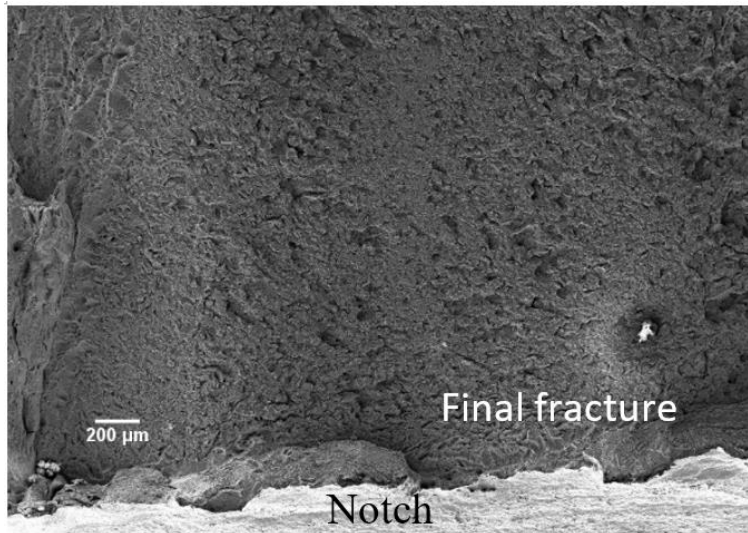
A SEM image of a typical fracture surface showing the wavy fracture surface appearance following the weld FB. Specimen: CVN specimen, tested in reference condition, $E = 38 \text{ J}$, and $T = -30 \text{ }^\circ\text{C}$.
